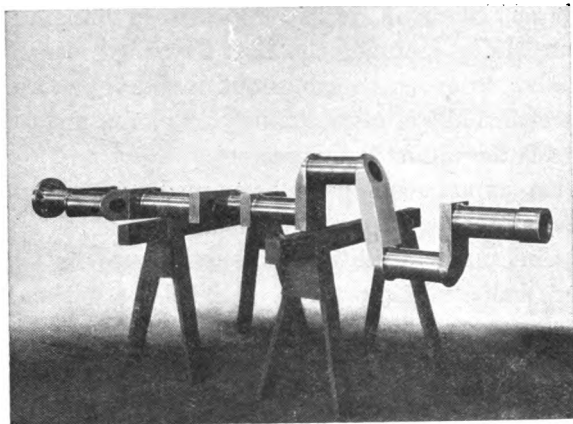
A FOUR-THROW, OIL-TEMPERED, NICKEL STEEL CRANK SHAFT FOR A HIGH-SPEED YACHT ENGINE OF 4,000 H. P. DIAMETER OF SHAFT AND PINS, 5 INCHES; DIAMETER OF BORE, 3 FEET 3½ INCHES X 4 INCHES; LENGTH, 9 FEET 5 INCHES; WEIGHT 579 LBS.
